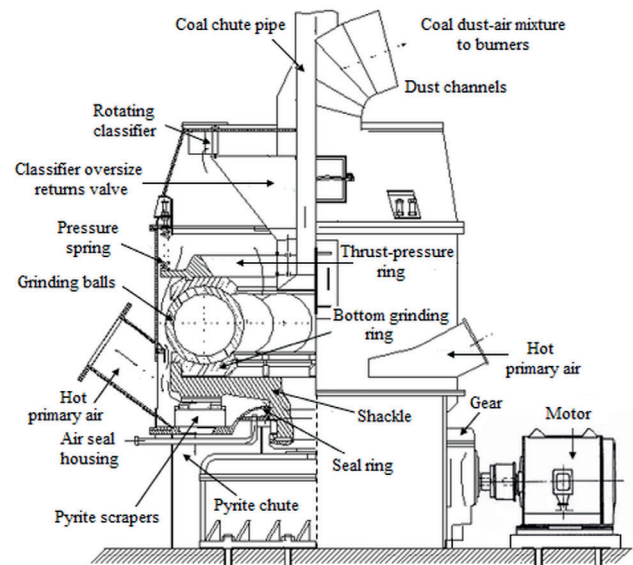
A schematic drawing of a ball-and-race MKM type coal mill
